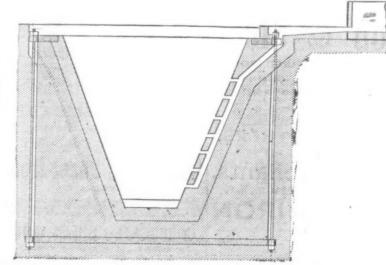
Section of Mold for Casting Steam Hammer Anvil.
